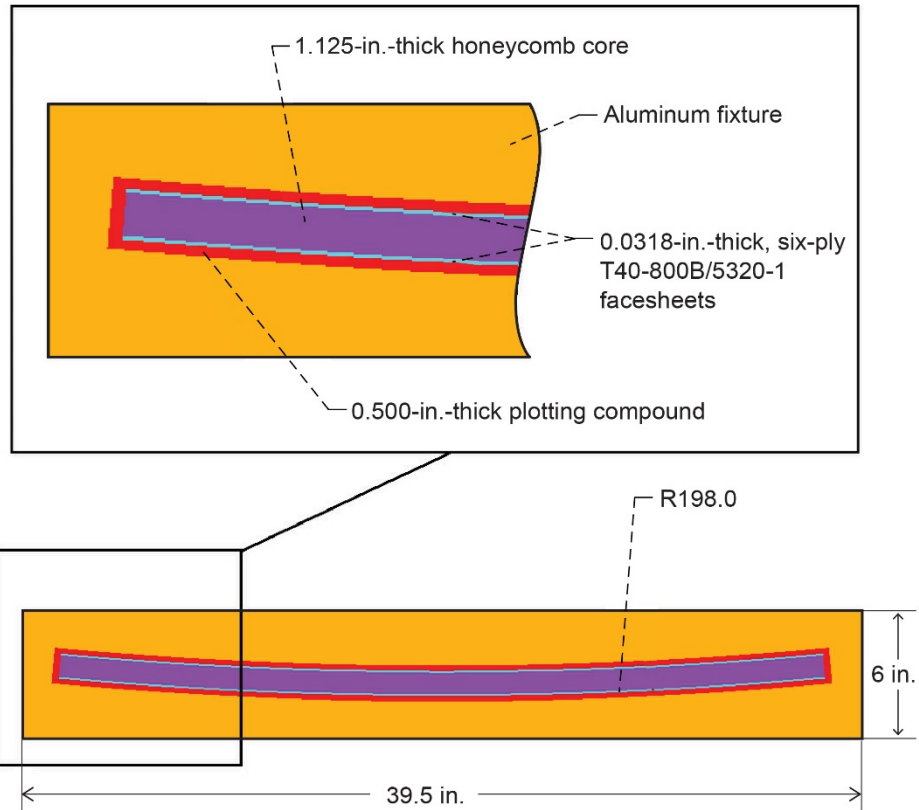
Six-ply, 3- by 5-ft arc segment test panel and test fixture end view.
